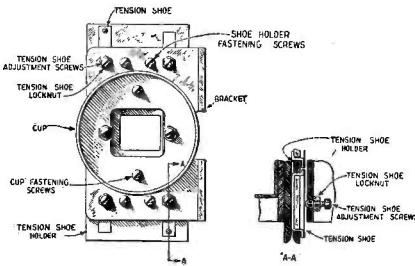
Front section of the picture gate, showing the location of adjustment screws
